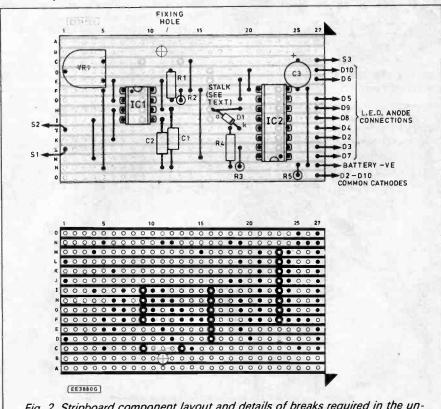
Stripboard component layout and details of breaks required in the underside copper tracks. Do not connect the diode D1 anode to the short lead from hole H19 at this stage, wait until after the setting-up has been completed.
